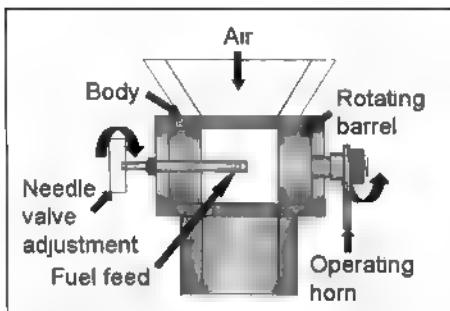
An internal view of a rotating-barrel carburettor showing the moving parts.
